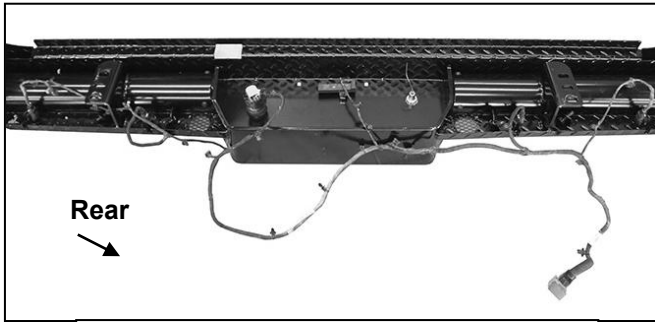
Completed installation of the keyfob and BSM sensor. NOTE: Sensors have been removed for clarity.
